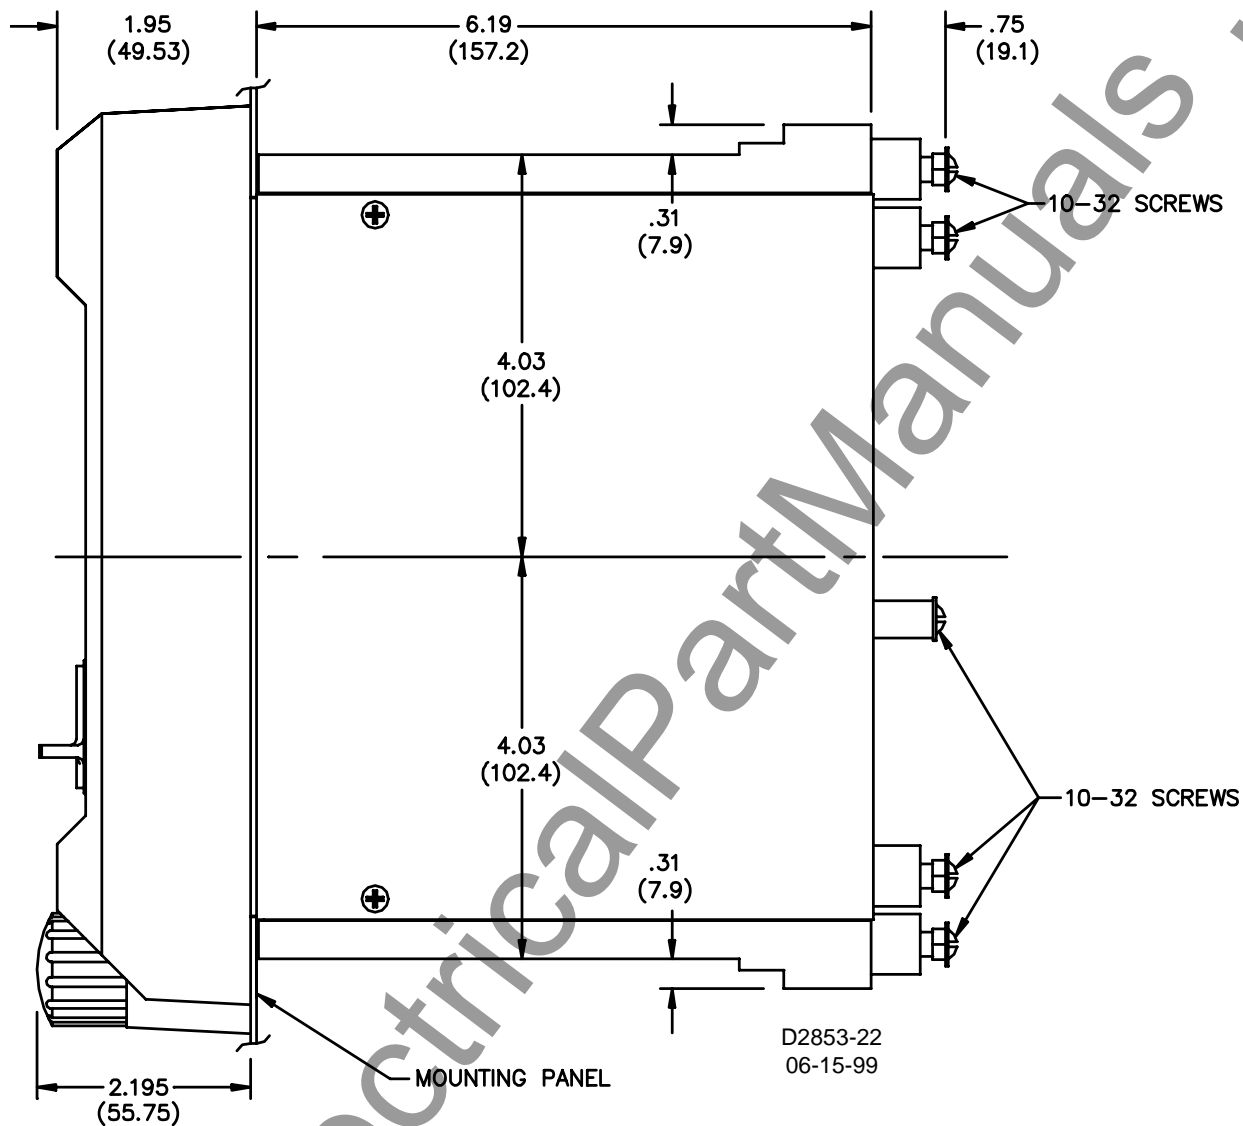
S1 Case Dimensions, Semi-Flush Mounting, Side View
